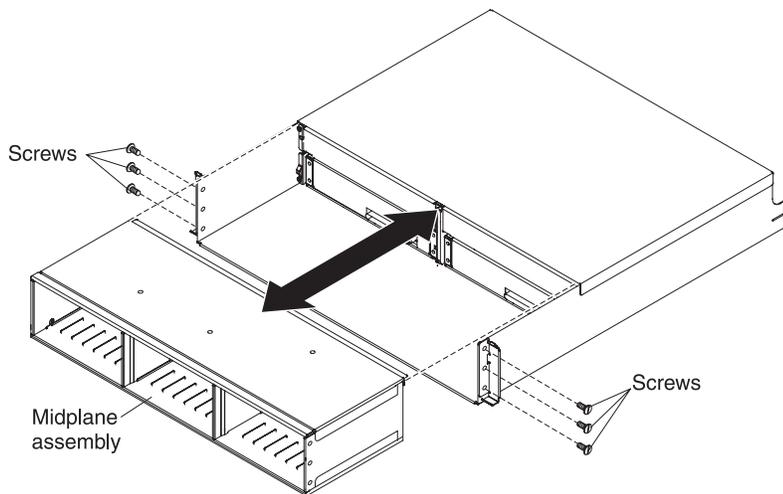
Replacing the midplane assembly in a DS3524 or EXP3524
